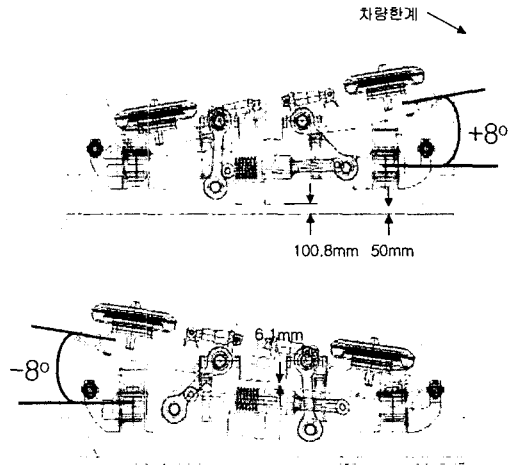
Side view of tilting mechanism with tilting angle $\pm 8^\circ$.
